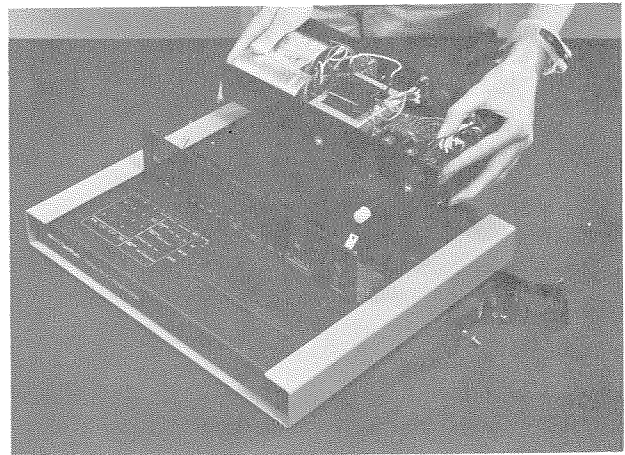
Removal of the power supply. The ribbon cable must be disconnected first. The display board can be left in place, but has been removed in this picture.
